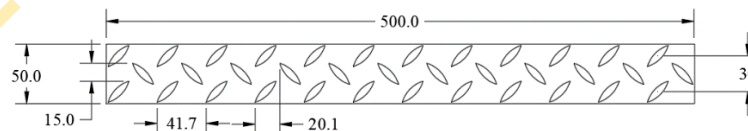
Arrangement of for dimples/protrusions on each side of the duct (dimensions in mm)
